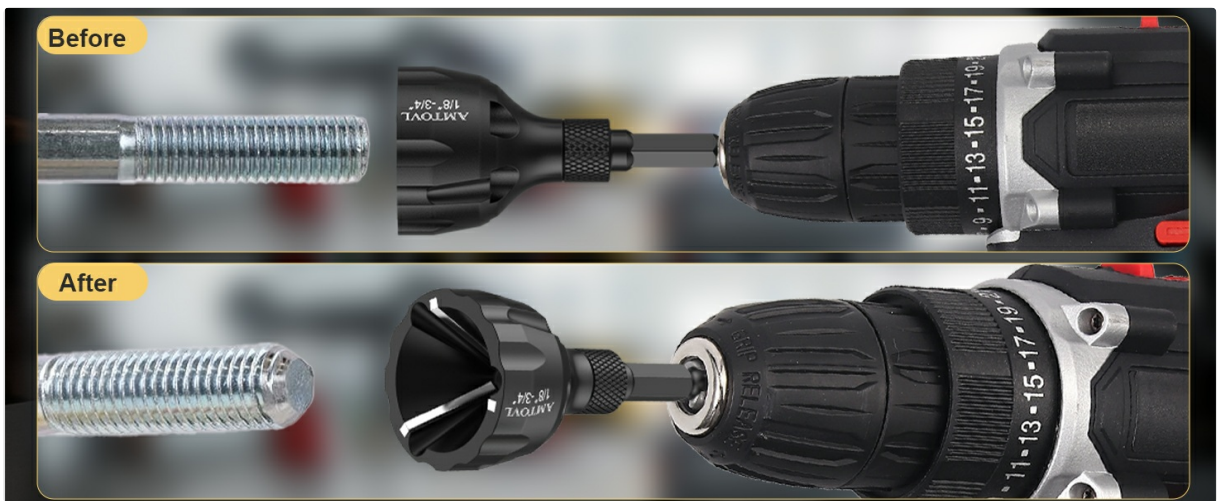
A visual comparison demonstrating the effectiveness of the deburring tool on a threaded bolt, showing a clean, chamfered edge after use.
